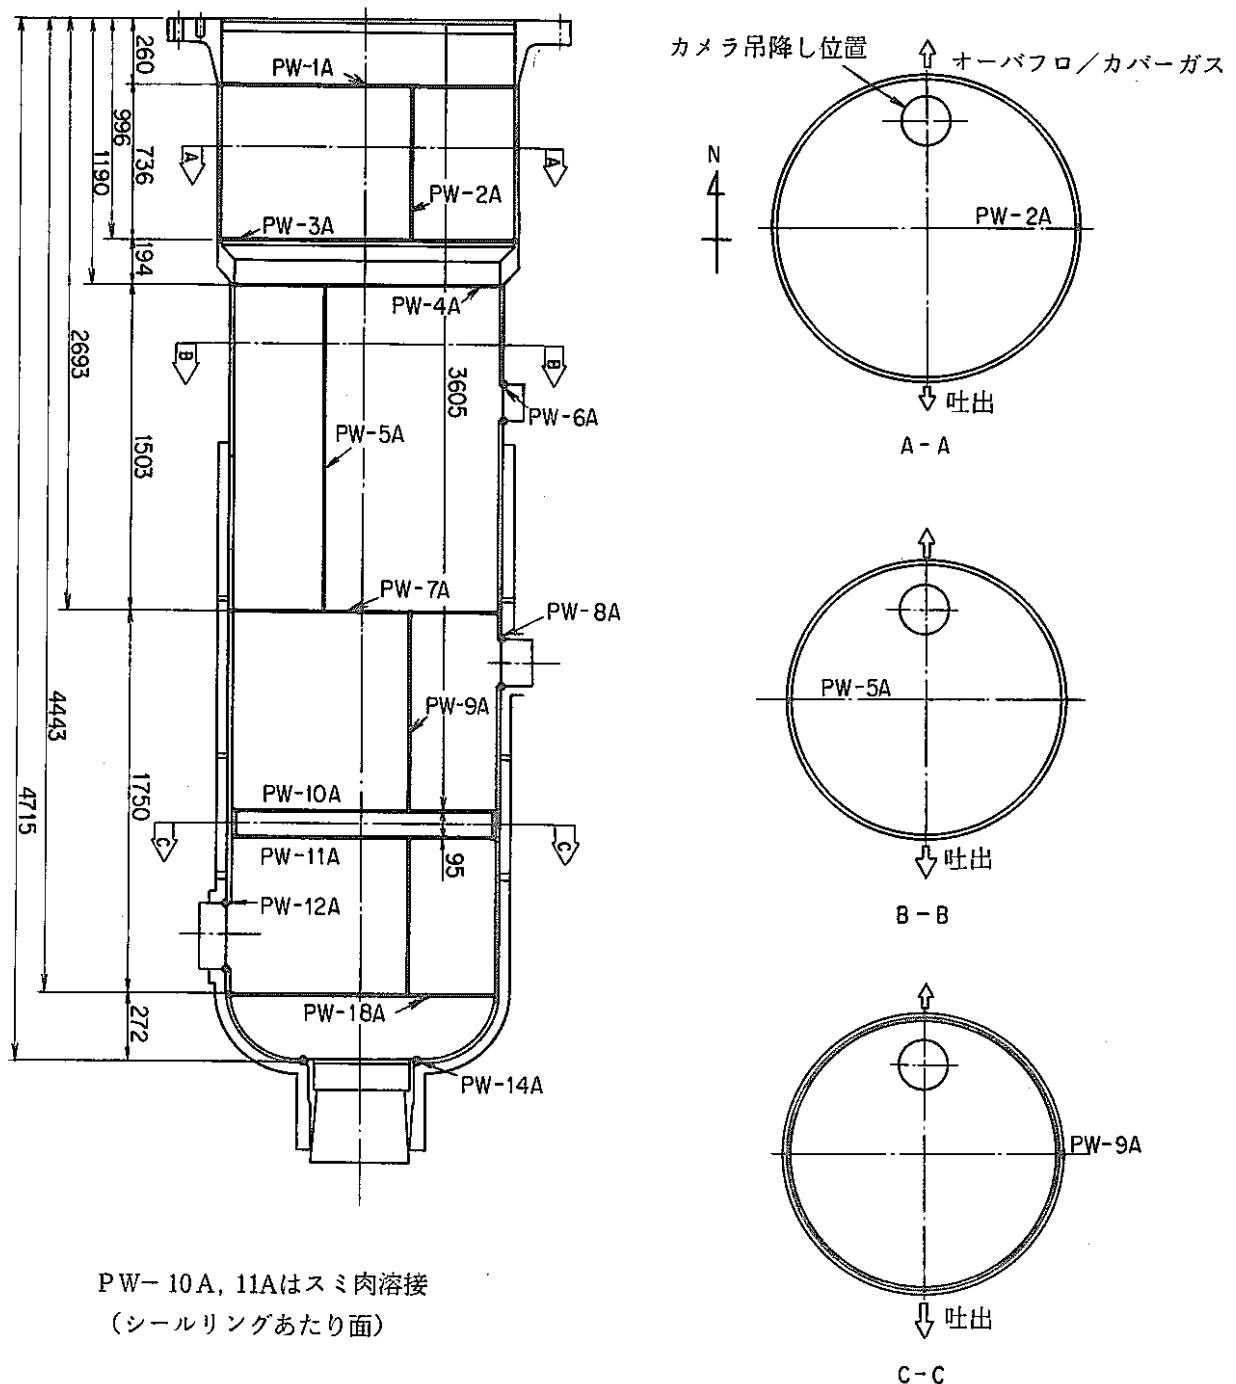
Weld Locations of Pump Outer – Casing
